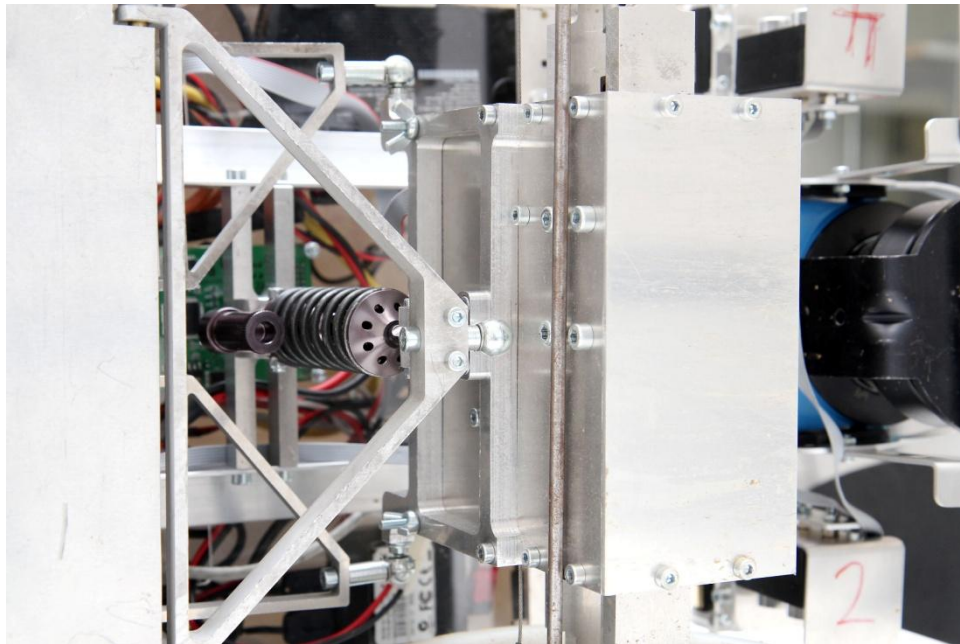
The axle modules hold a lot of technology that were enclosed with aluminium plates
